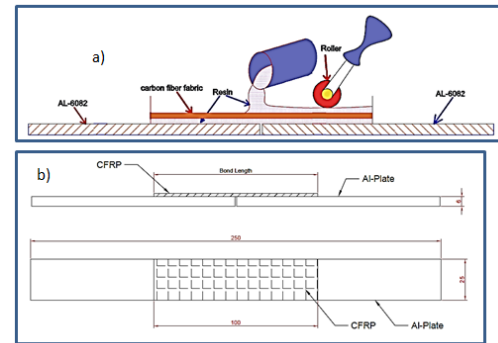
a) Fabrication process of Al-CFRP-Al adhesive joint, b) Dimensions of Al-CFRP-Al adhesive joint.
